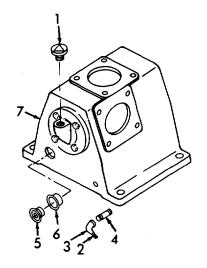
Oil Filler Cap, Plug, and Sight Gage, Installation.
